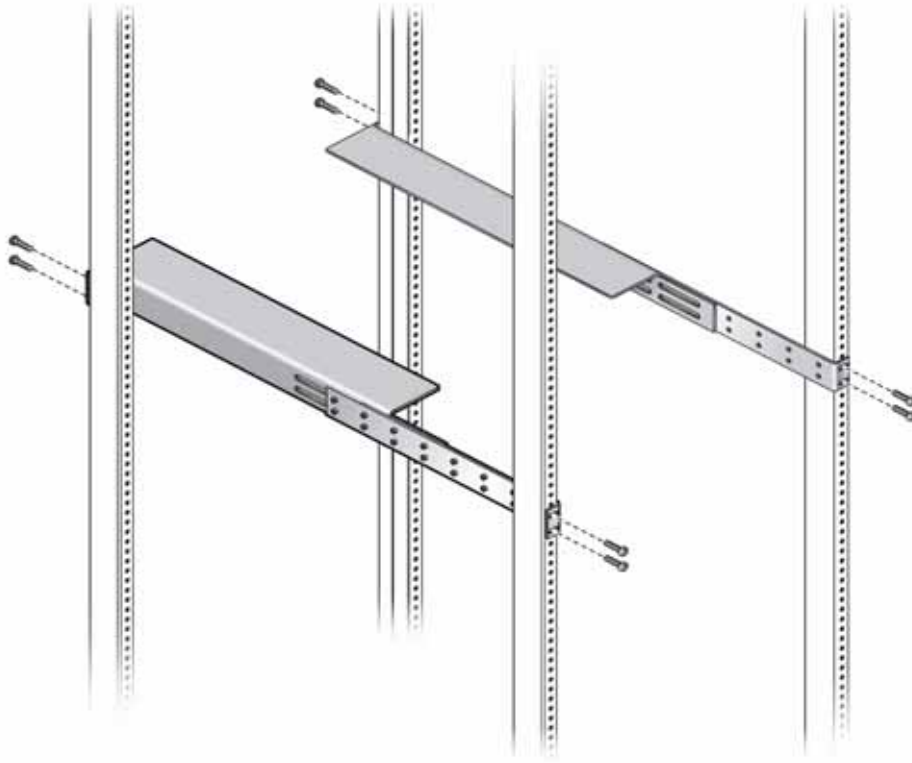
Installing Assembled Rack Mount Rails into Equipment Rack
